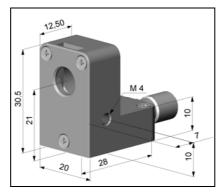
Laminar air purge collar – the sideward air outlet prevents a cooling down of the object in short distances; hose connection: 3x5 mm [TM-APL-CS]
